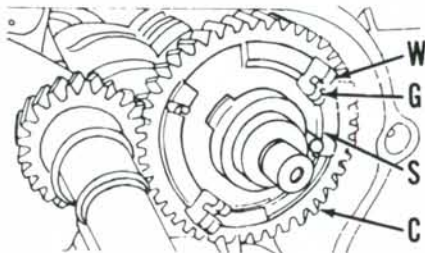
View of MF180 governor weights (W) and spring (S) installed on camshaft gear (C). MF260 assembly is similar but more weights are used. Governor collar is not shown but must engage groove (G) in weights.
